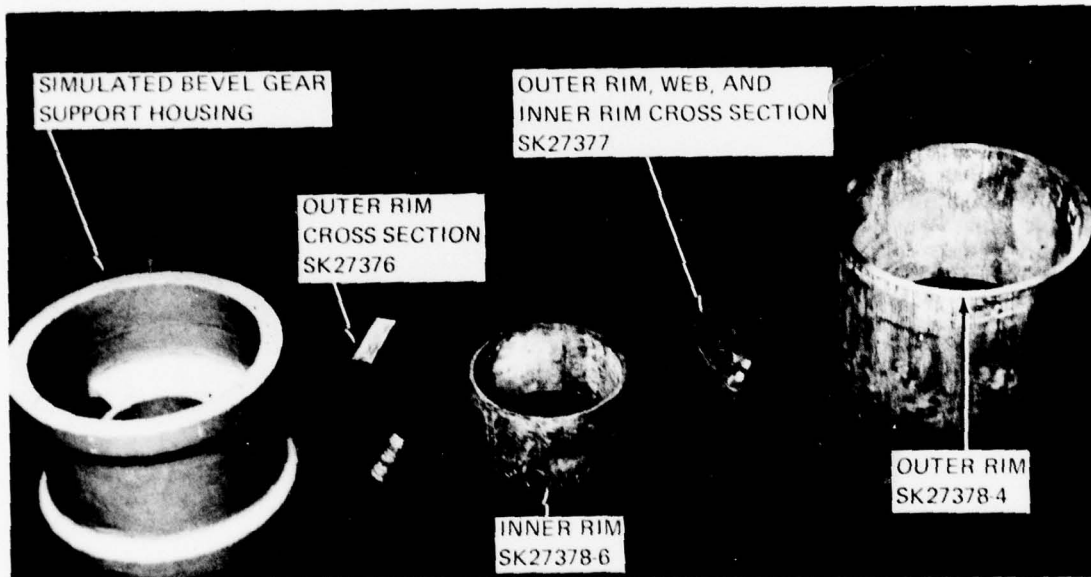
Fiber FF/Magnesium Component Test Specimens and Case Assembly.
